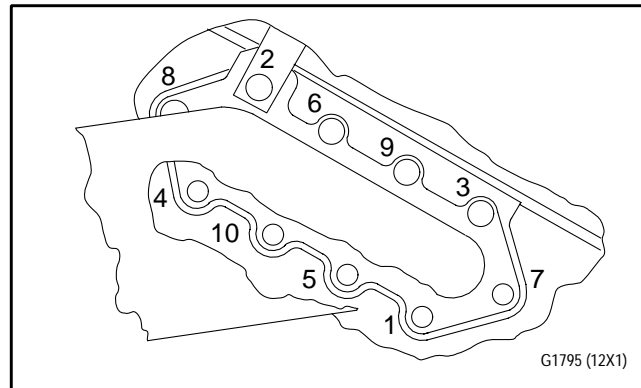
Compressor Bleed Tube Assembly - Torquing Sequence
